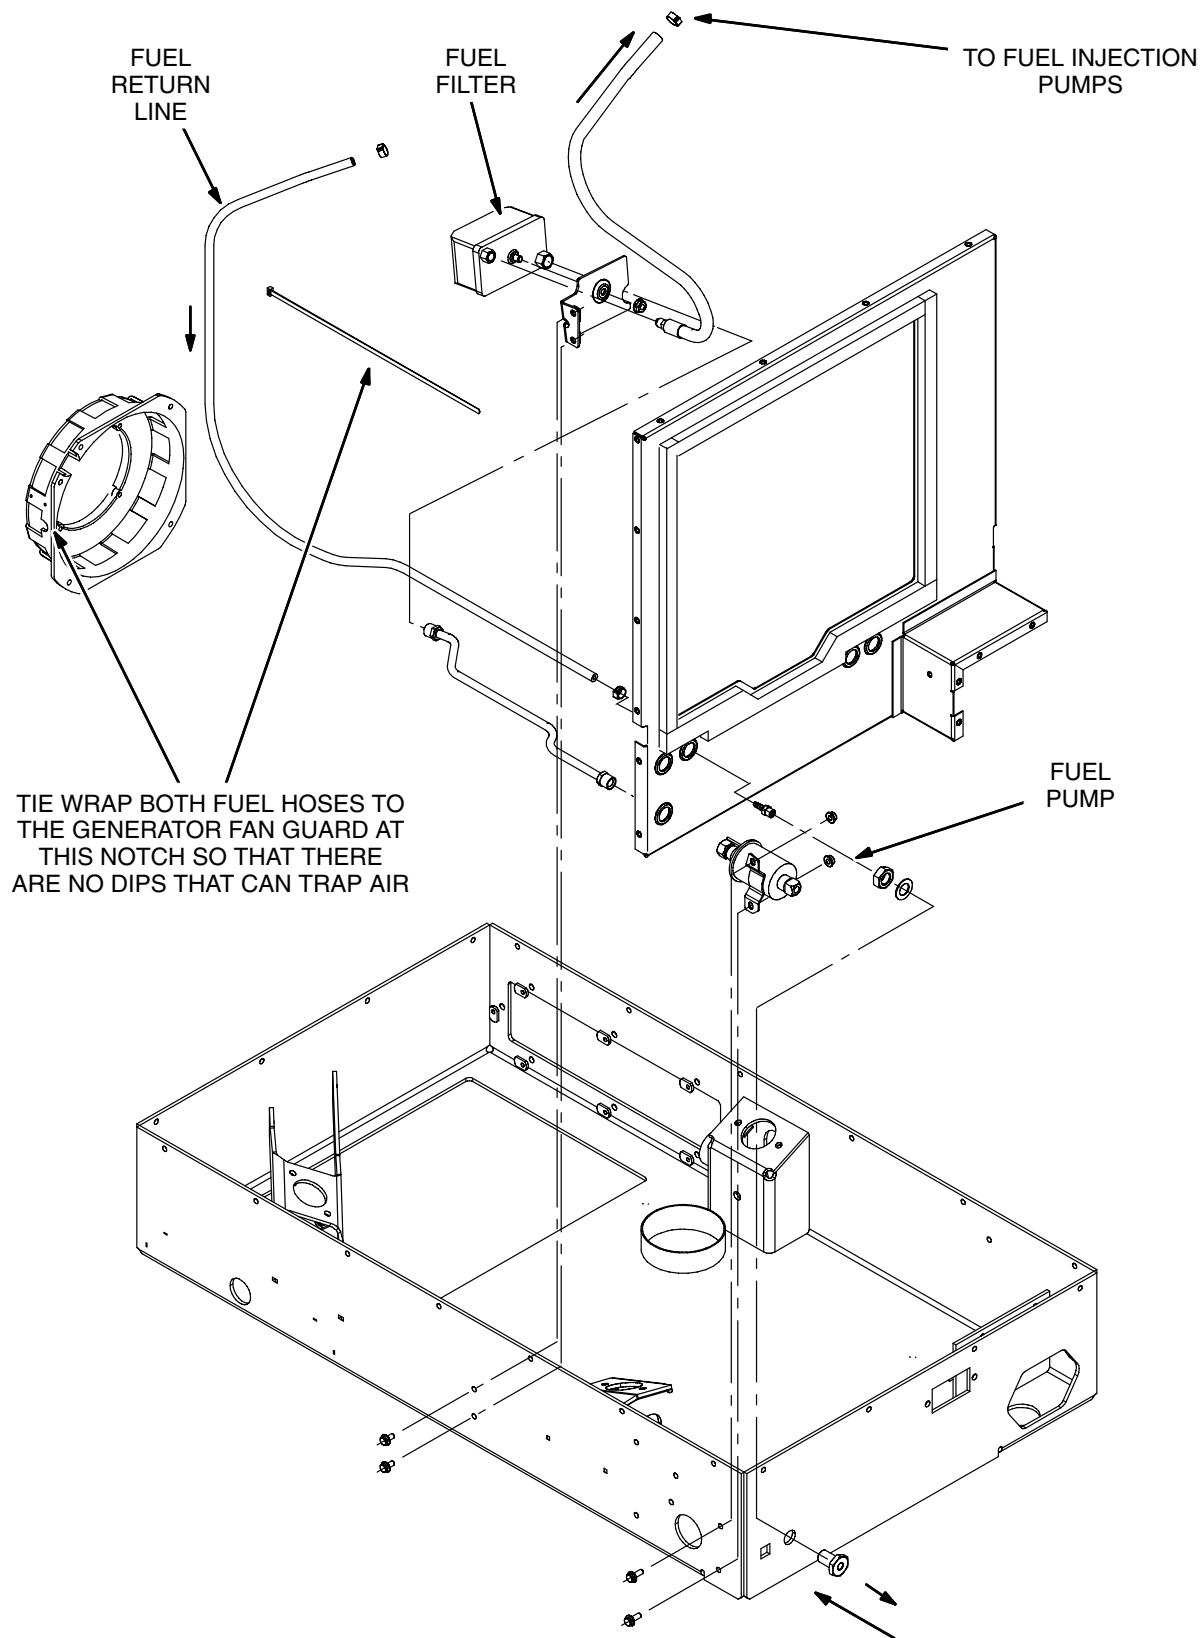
FUEL SYSTEM TO ENGINE
